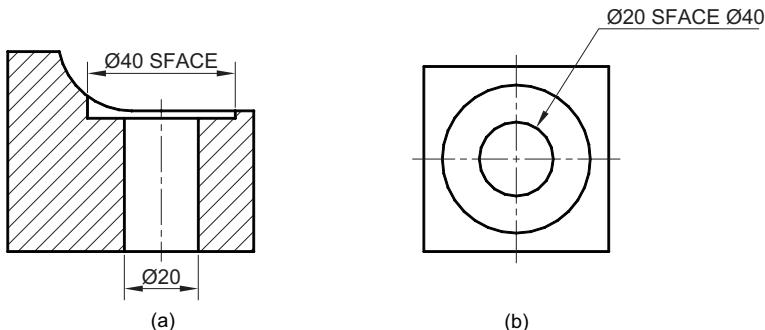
Spotface dimensioning in the (a) sectional front view (b) top view
